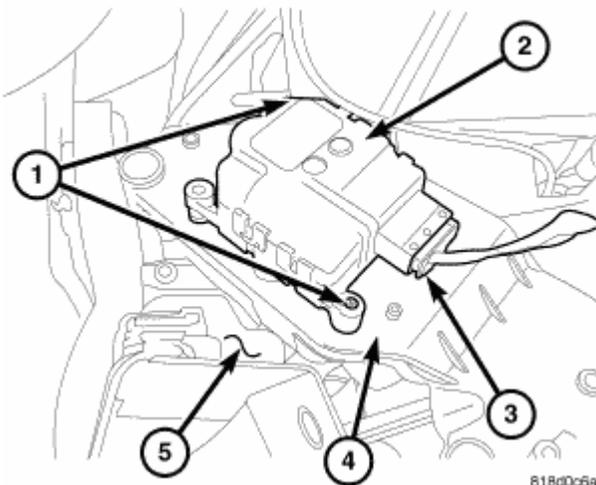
Identifying Screws, Mode Door Actuator, Wire Harness Connector, Actuator Mounting Bracket & Air Distribution Housing
